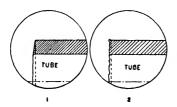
TUBE ENDS AFTER CUTTING.
